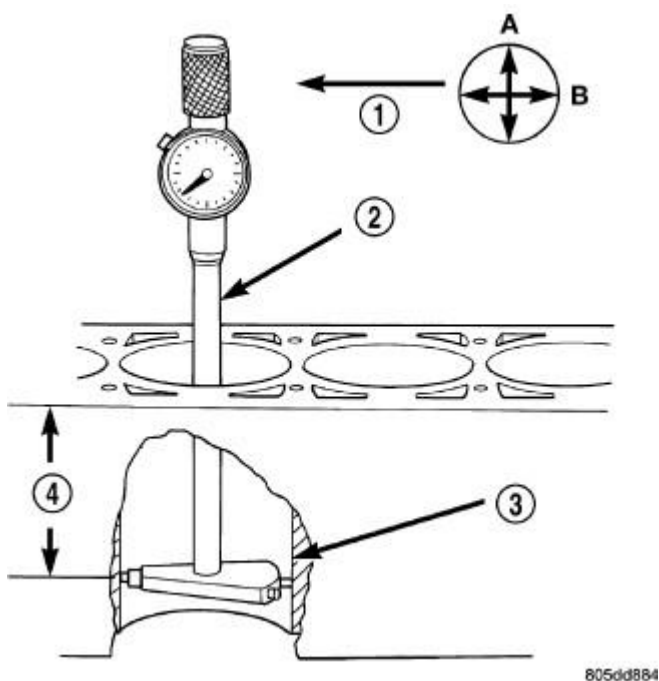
Using Bore Gauge To Measure Cylinder Bore Diameter
